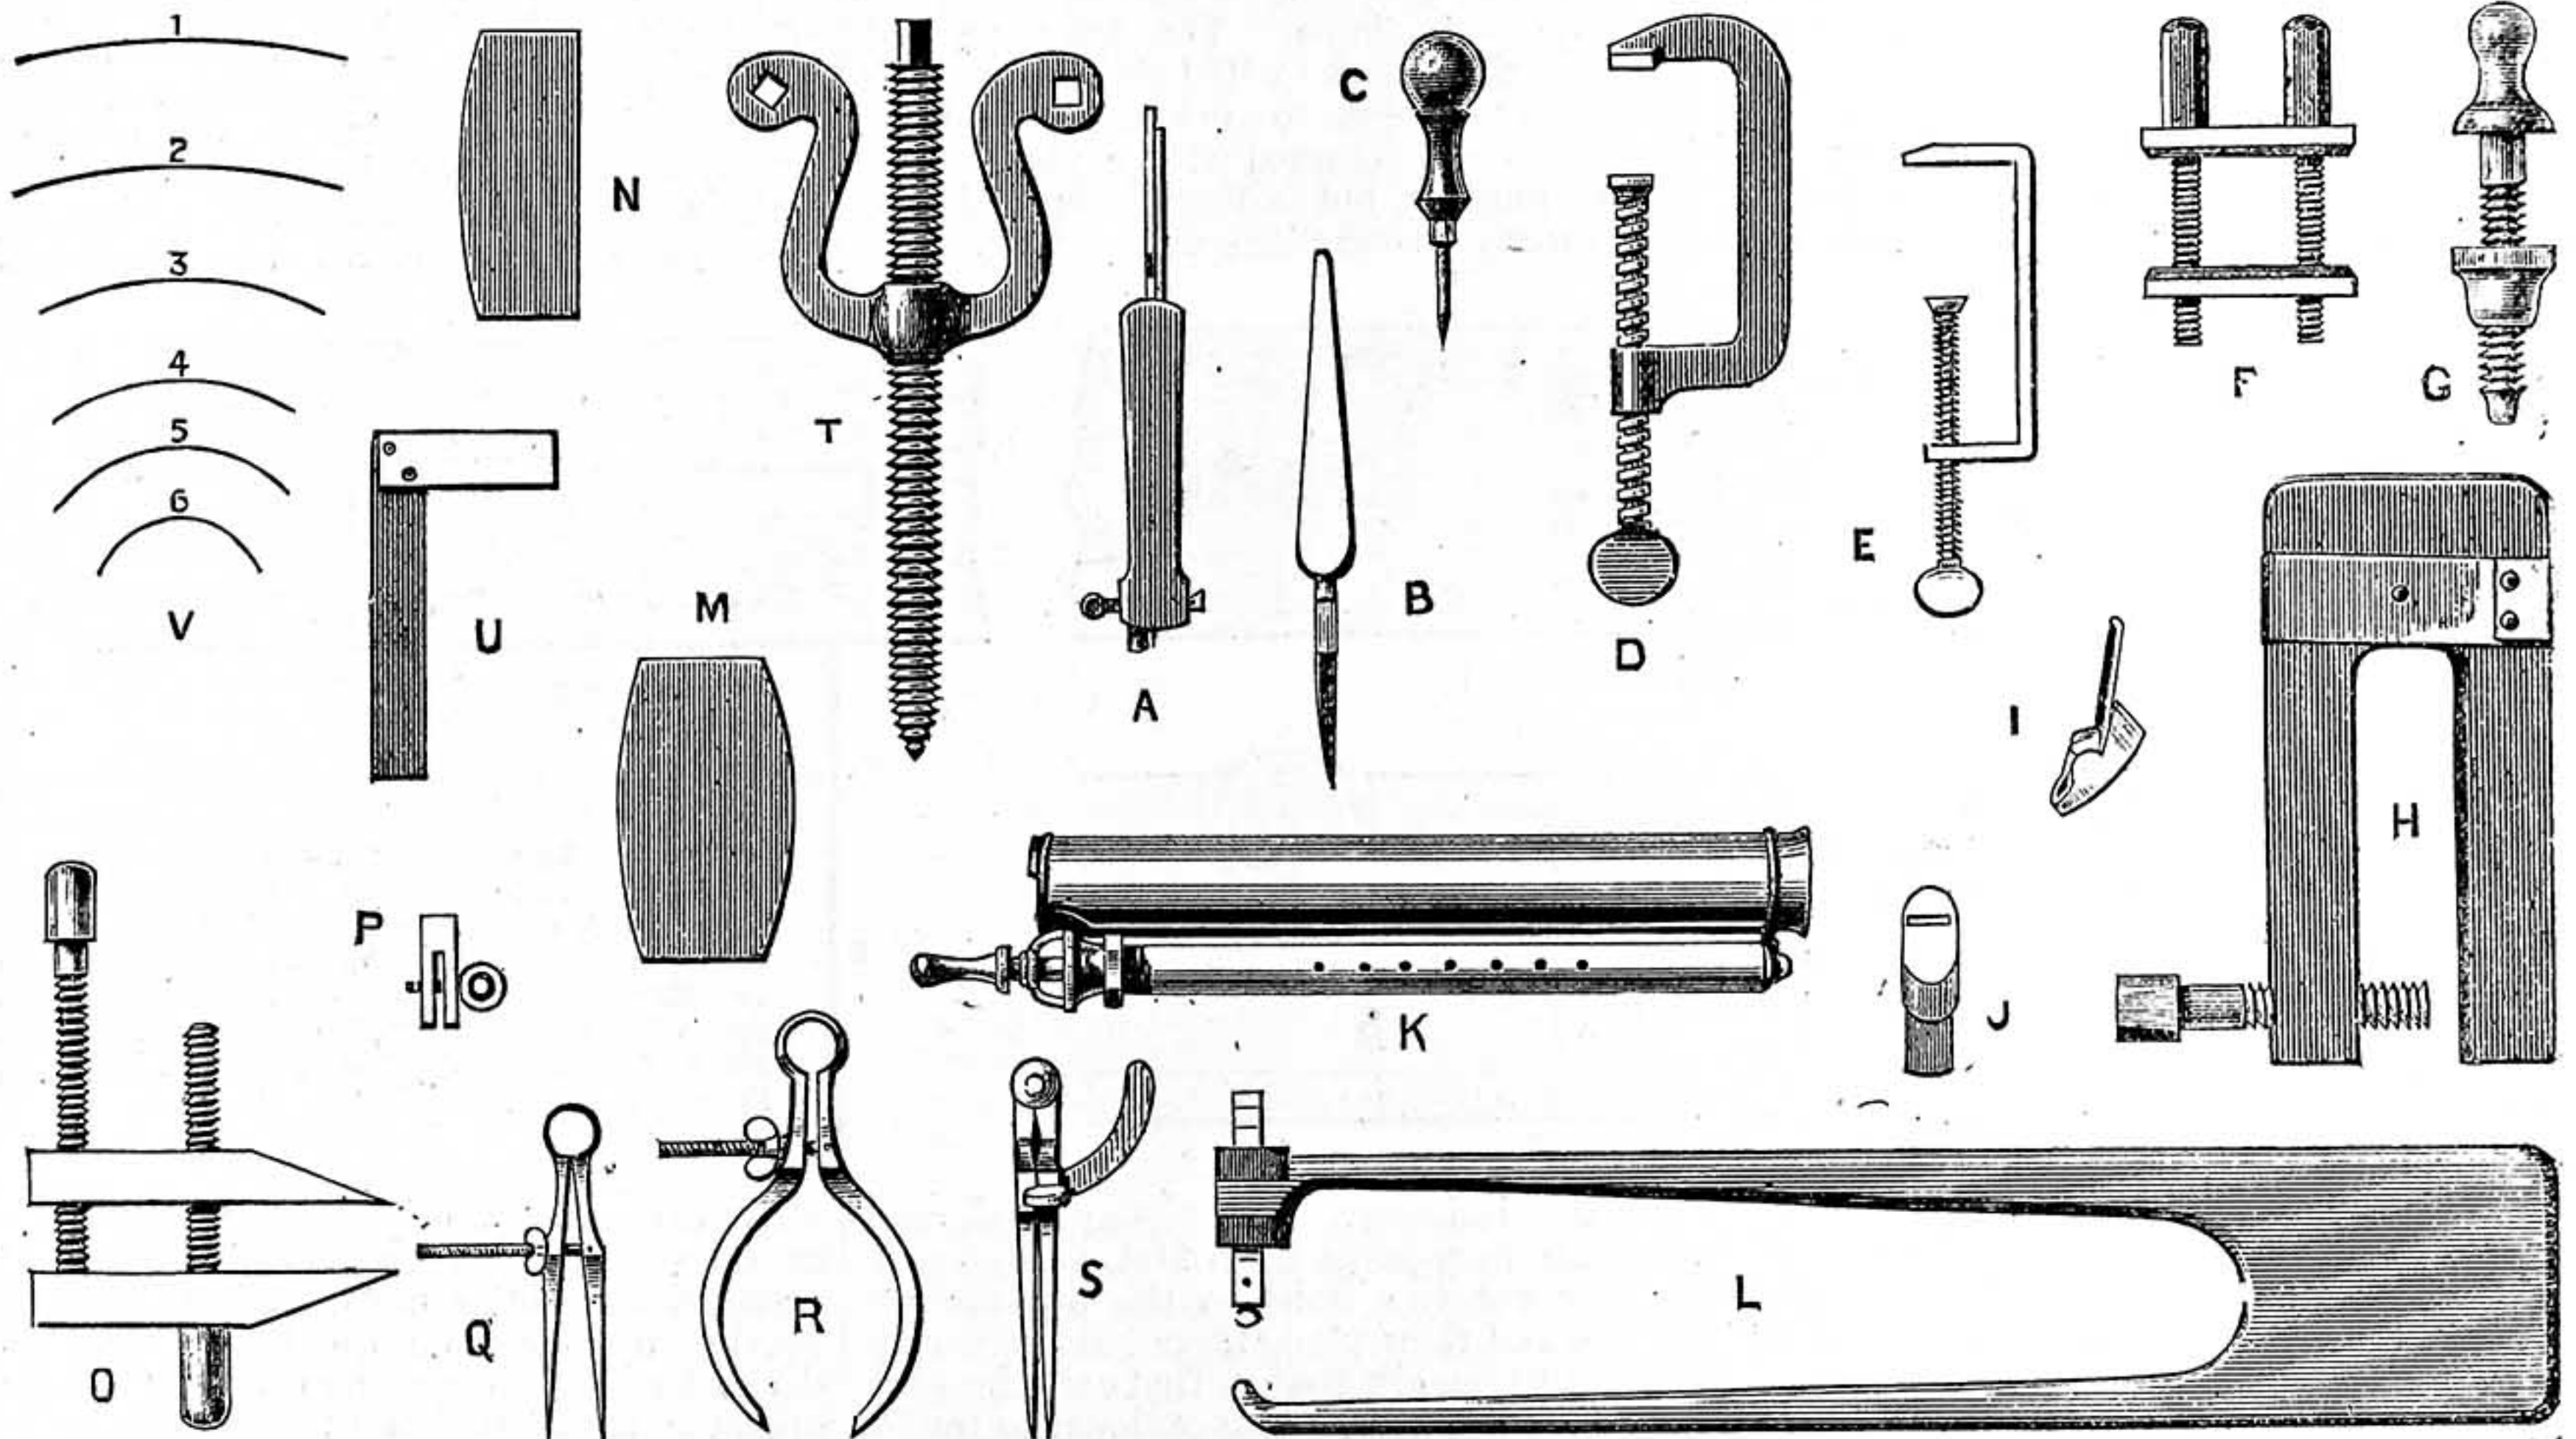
Some Special Tools used in Violin Making—A, Purfling Gauge or Cutter; B, Knife; C, Router; D, E, Iron Cramps; F, Cramp for fixing Back and Belly to Ribs; G, Cramp of Writer's Design; H, Wood Cramp; I, J, Small Iron Planes; K, Apparatus for bending Ribs; L, Thicknessing Gauge; M, N, Steel Scrapers; O, Hand Screws; P, Small Cramp; Q, Spring Dividers; R, Spring Callipers; S, Steel Compasses; T, Carver's Screw; U, Small Square; V, Sweeps or Curves of necessary Gouges.
